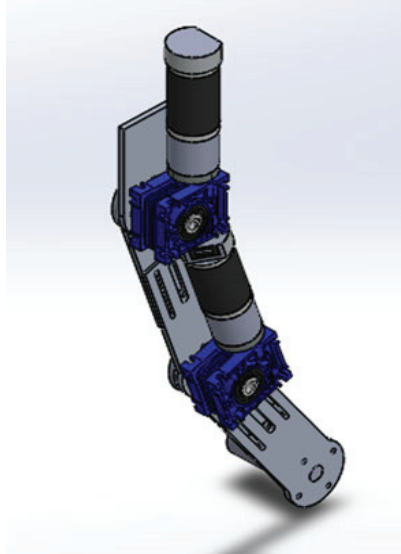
Solidworks drawing of lower limb exoskeleton
